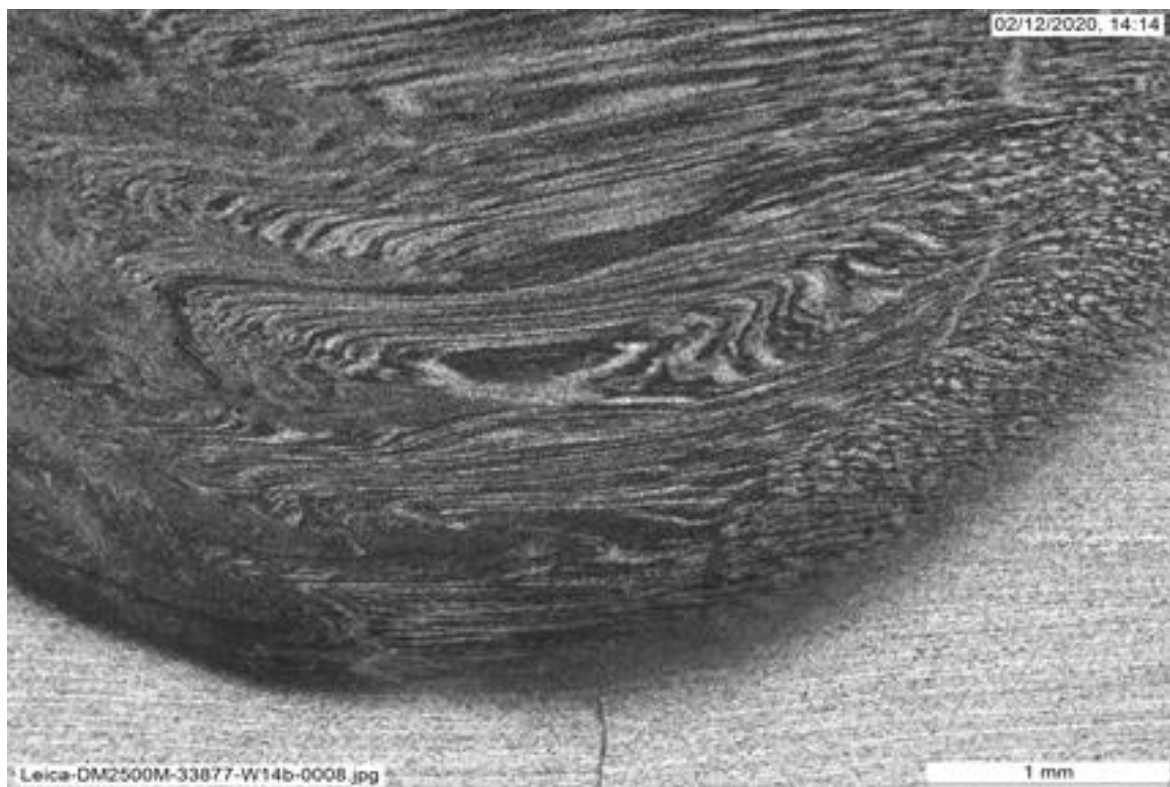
Lack of penetration defect at the root of a steel weld where the tool probe has not passed sufficiently close to the lower face of the plates being welded.
